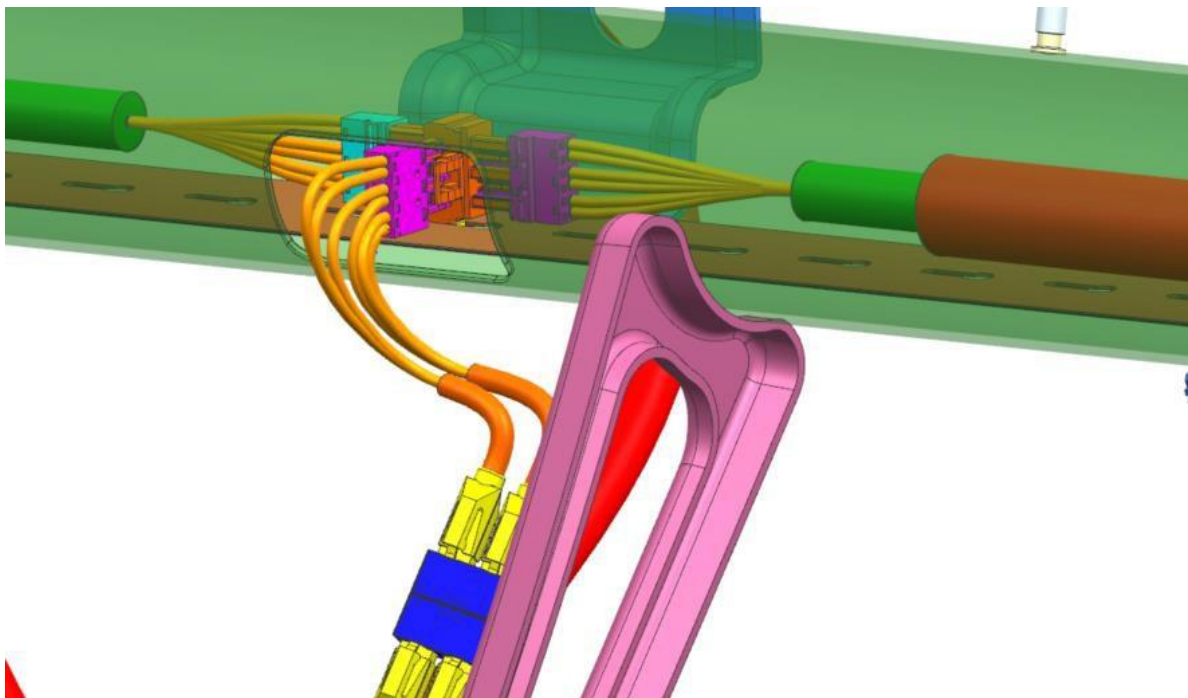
Wago carrier and clip mechanisms layout for routing cable management
